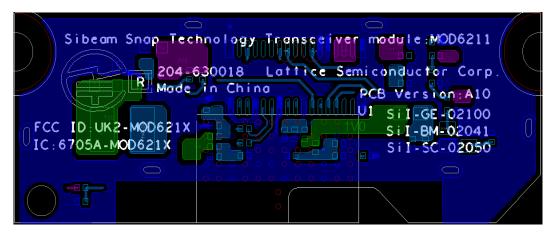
MOD6211 Transceiver Module Layout Floorplan
